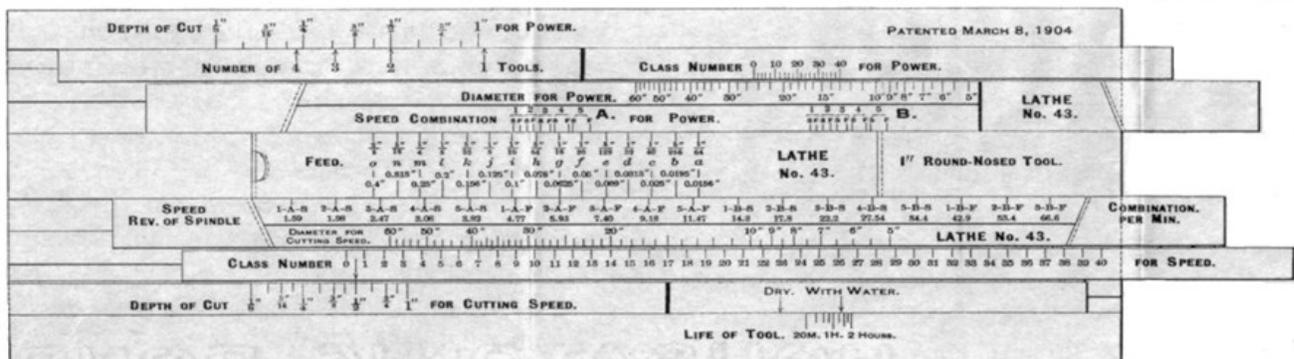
A machine-time slide rule with five movable members for calculating optimal feed rates, machining speeds, and cutting for lathe machining of steel using hardened tools. *Journal of the Oughtred Society*, 9(2), 34.
